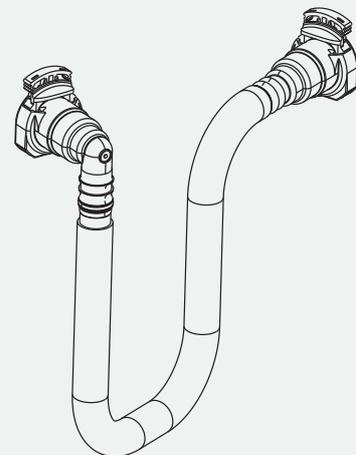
NYLON FUEL HOSE ASSEMBLY
